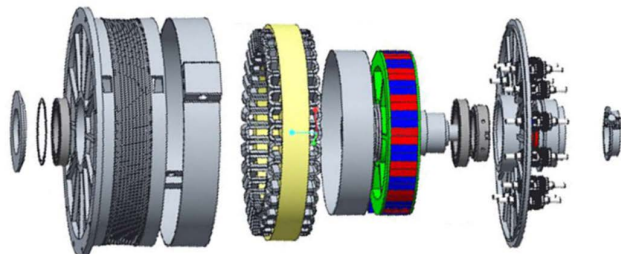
Illustration of an aircraft PMSM exploded view [109].
